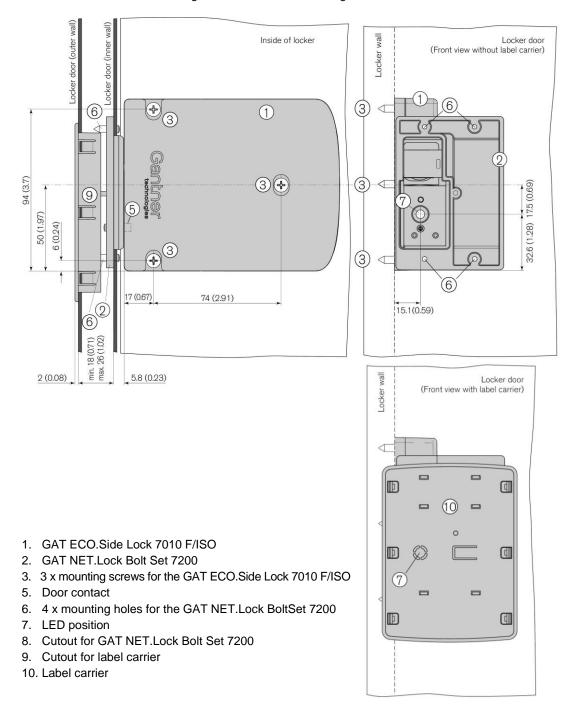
Installation in a locker with metallic, right-hinged door (dimensions in mm – inches shown in brackets)
